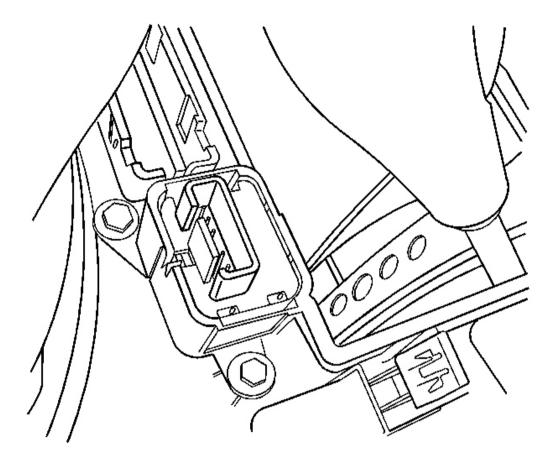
View Of Front Fog Lamp Switch Courtesy of GENERAL MOTORS CORP.
